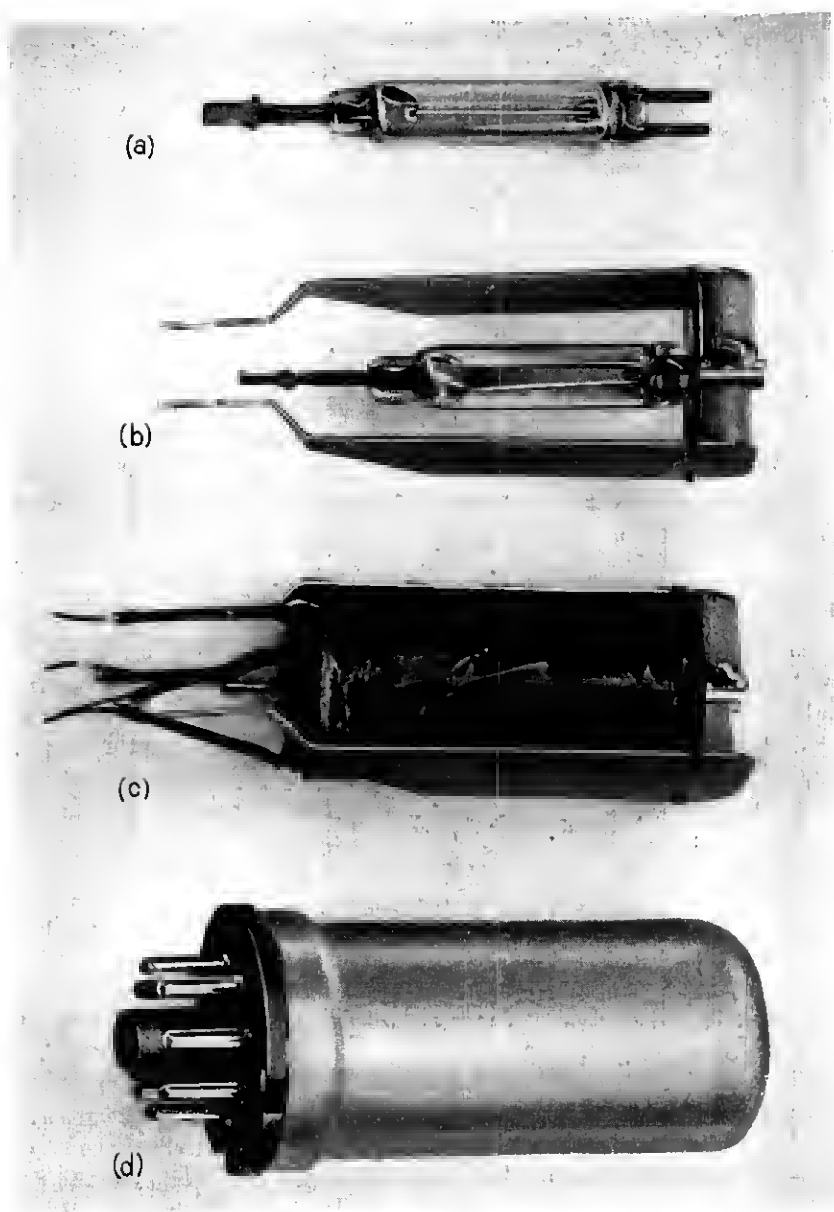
(a) Switch element. (b) Magnets, spool, and side plates added. (c) Coil added. (d) The complete relay.
